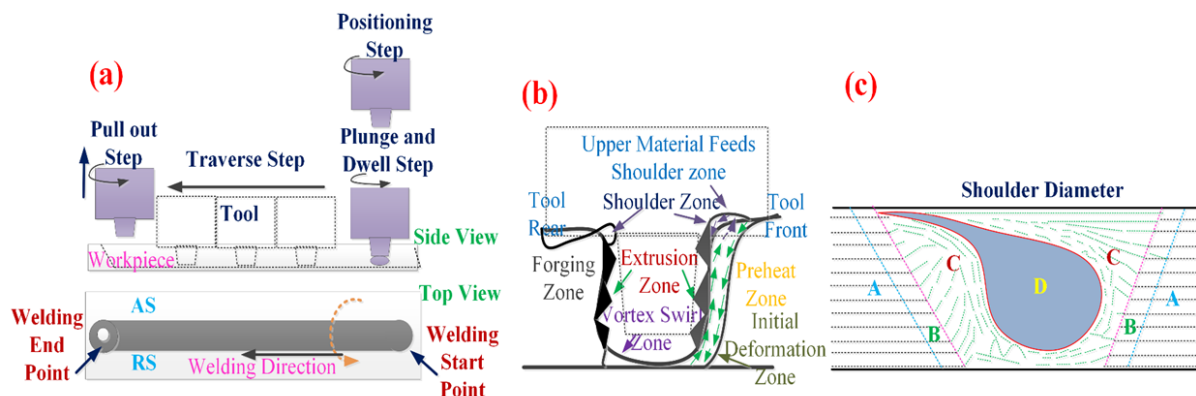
(a) Illustration of FSW process (b) metallurgical process during FSW (c) schematic cross-section of a typical FSW weld showing based metal with three distinct weld zones: (A) base metal, (B) heat-affected, (C) thermo-mechanically affected and (D) stirred (nugget) zone
